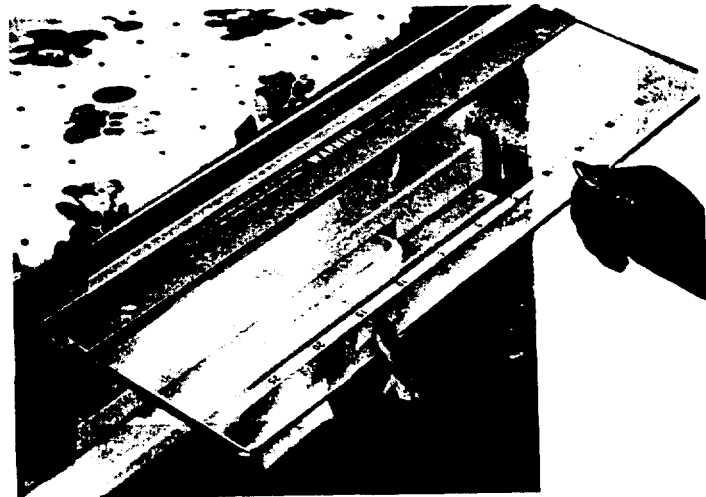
CHECKING THE BASSINET SIDE PANELS
